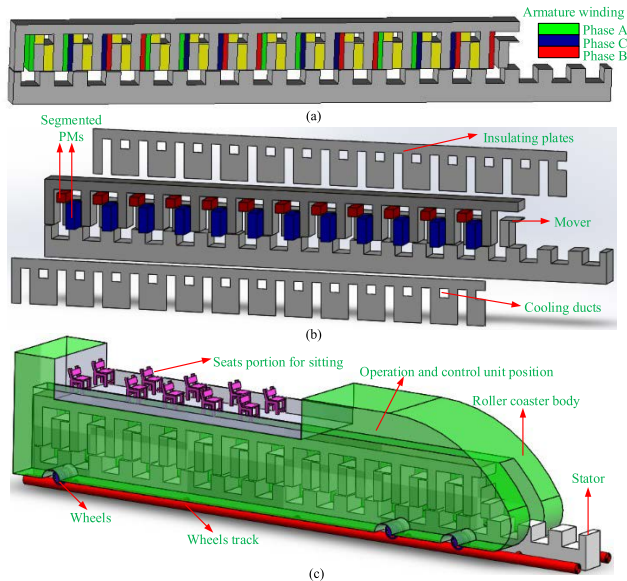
Cross sectional view of (a) 3D design (b) Exploded view of manufacturing process and (c) 3D CAD model of the final design prototype.
